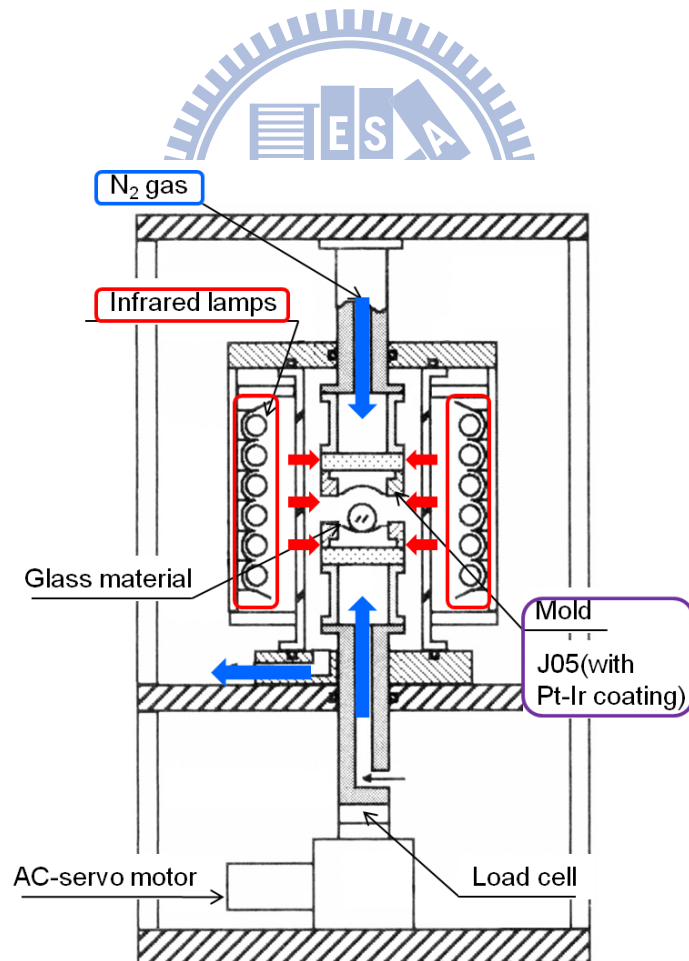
Schema of the optical glass lens molding apparatus GMP-207HV (Toshiba Machine Co.)
